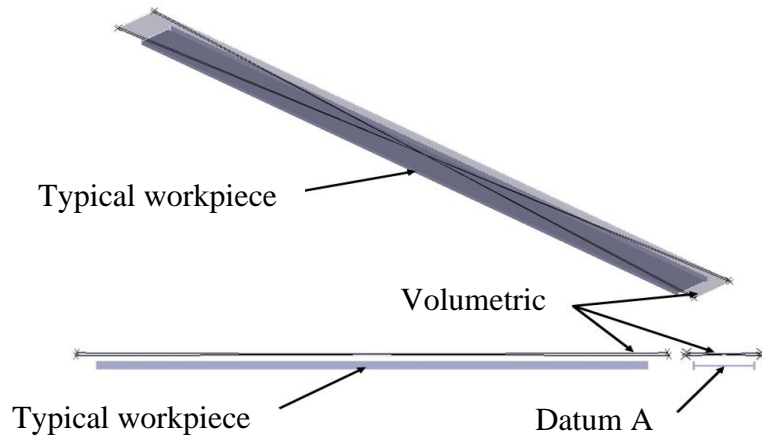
Illustration of a typical workpiece processed by the Bavius CNC Machining Center and the volume over which the volumetric test is to be applied.
